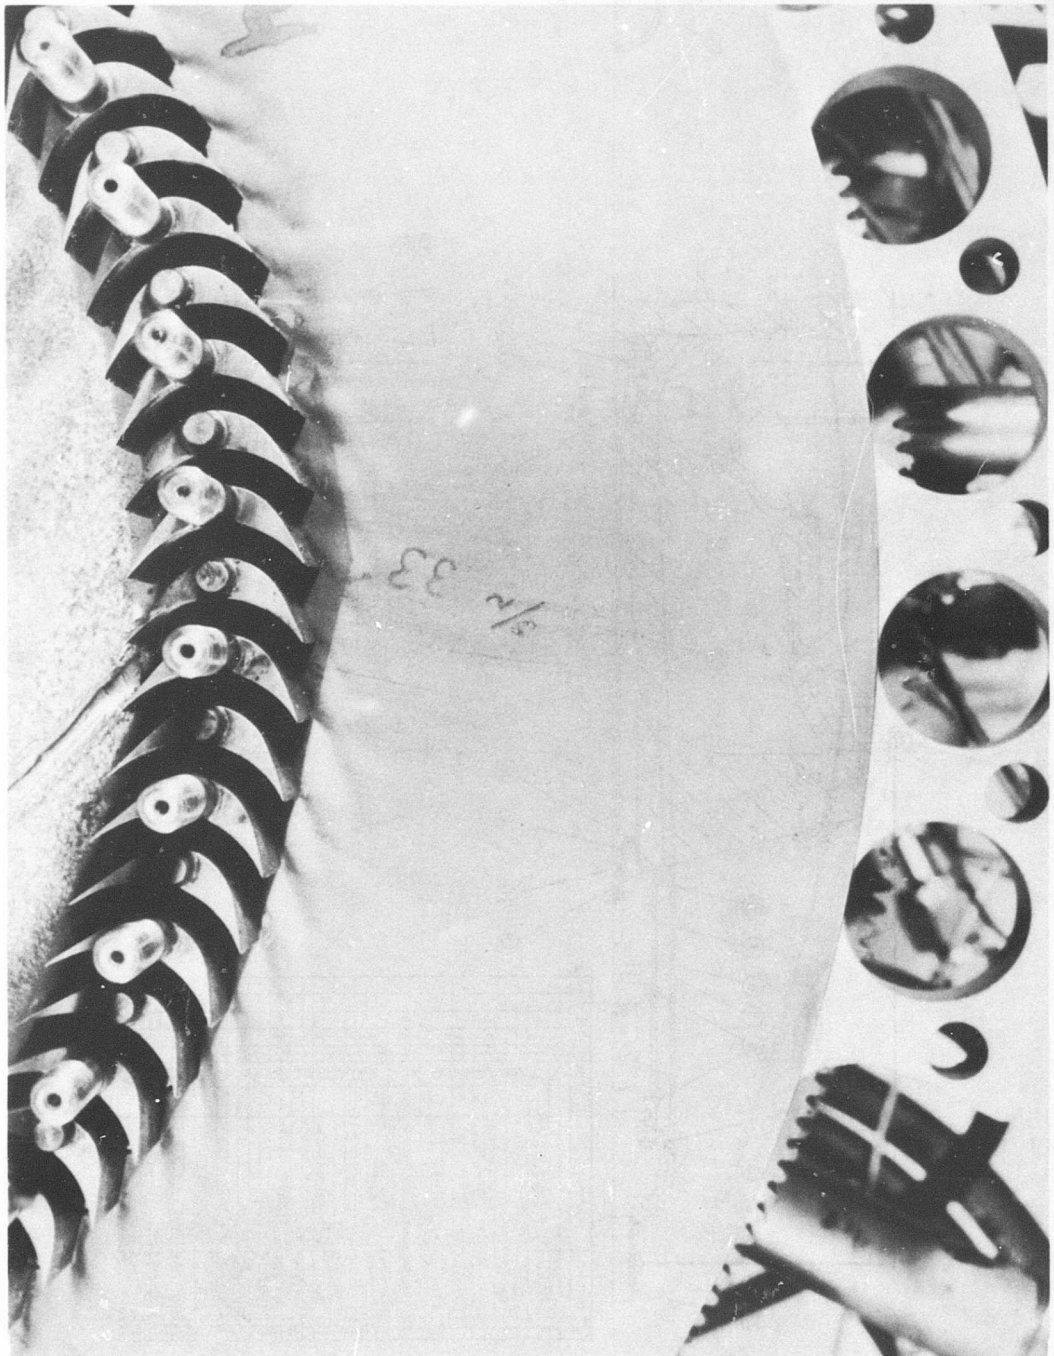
Dust Patterns on Rotor Disc Following Tests During Buildup C.
